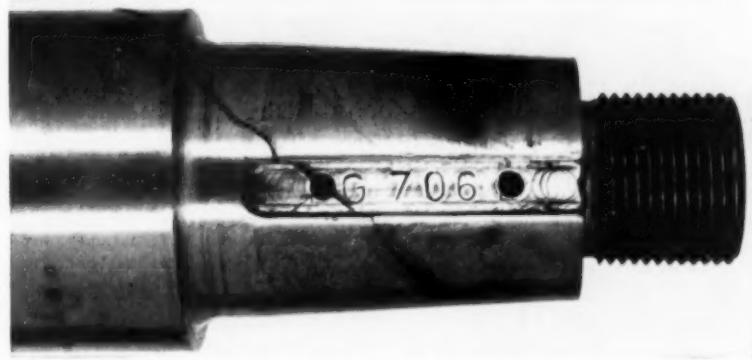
Torsional Fatigue Crack in a Machine Shaft
